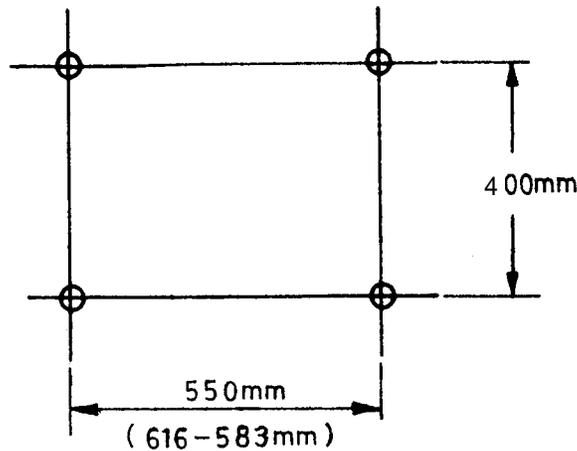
MOUNTING FOR MAIN EQUIPMENT
